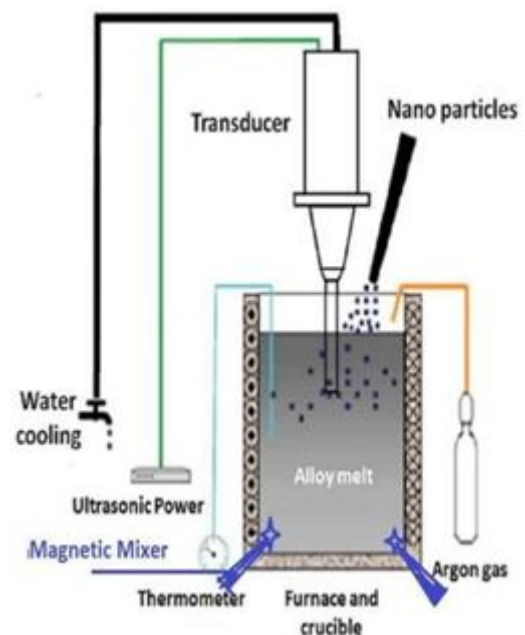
Imaginary Set for Manufacturing Al Metal Matrix Composites.
